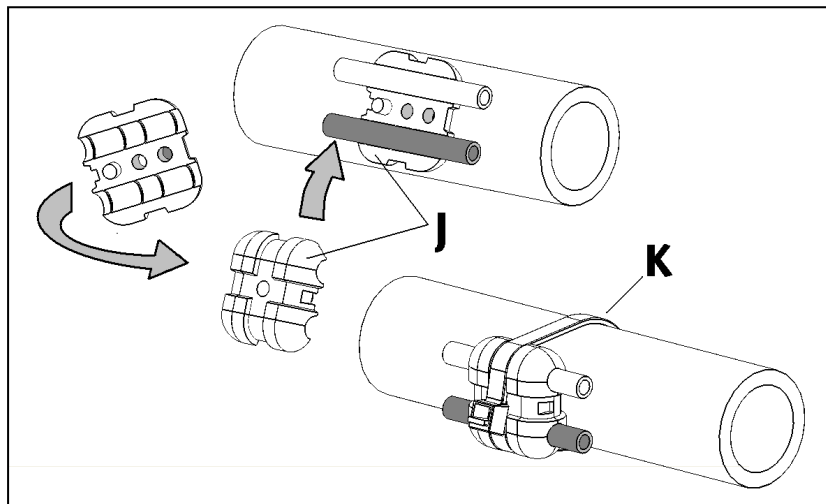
C – SINGLE PUMP AUTOFOAMER INSTALLATION – ENCLOSURE LAYOUT/ASSEMBLY
